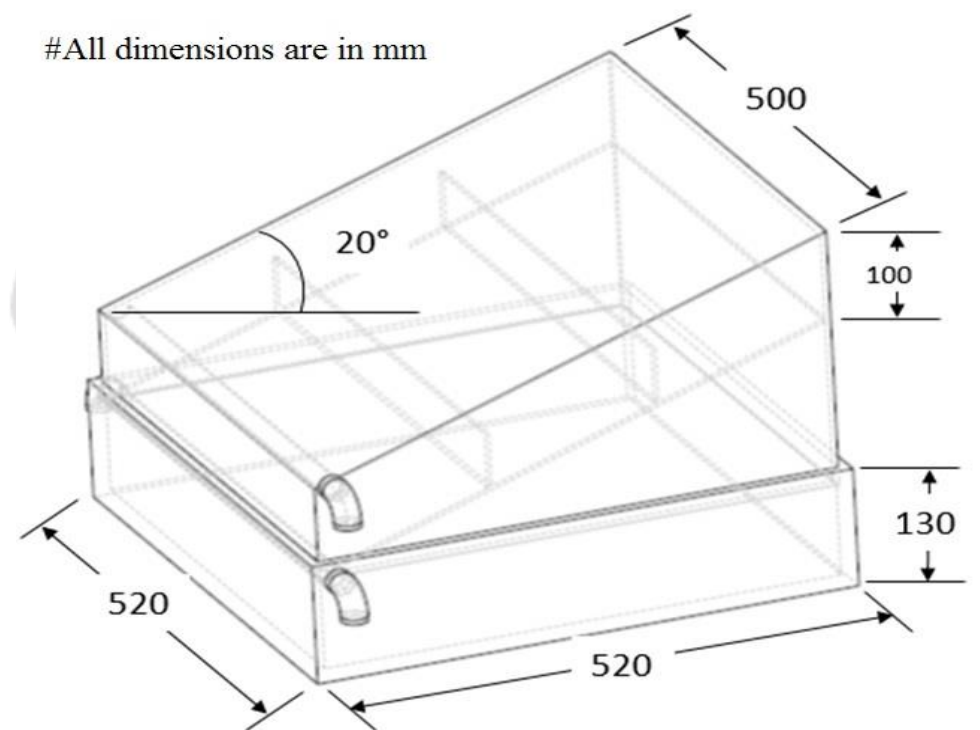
Wireframe model of actual setup of double basin solar still with basic dimension.
